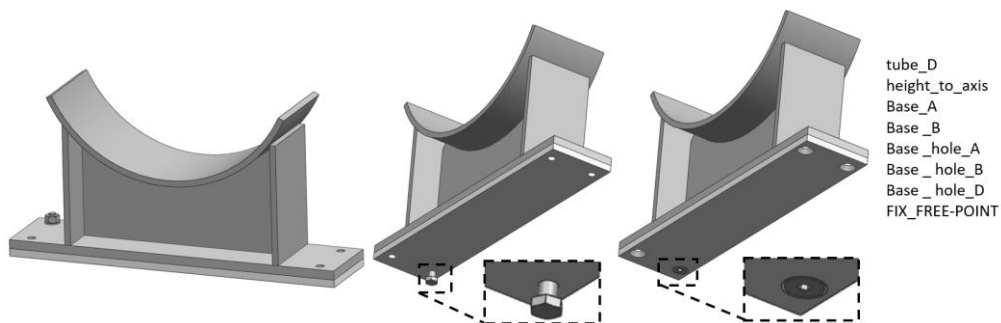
Bottom support – fixed (b) and sliding version (c)
